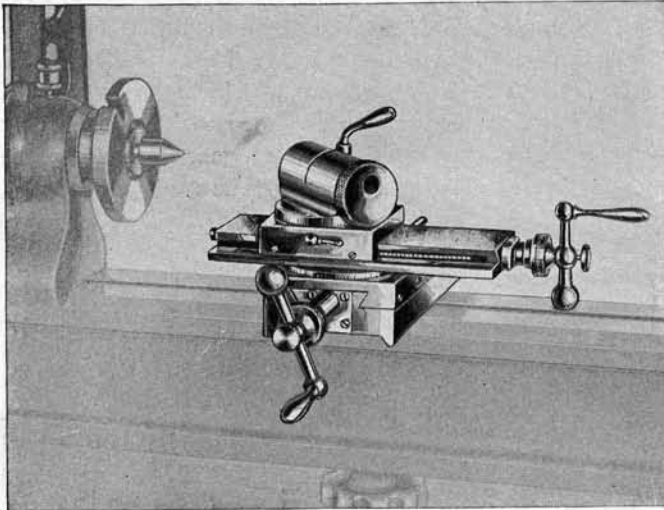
a. Compound Slide Rest with Eccentric Tool Holder.
